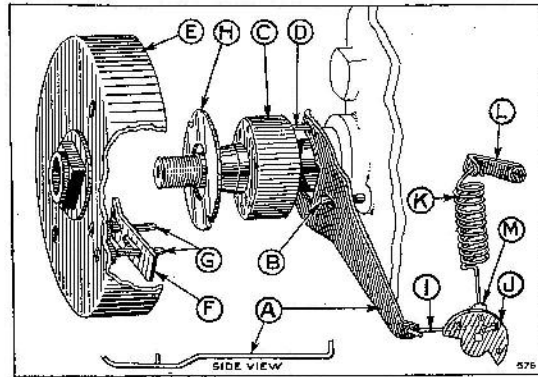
GOVERNOR ASSEMBLY AND HOOK-UP
